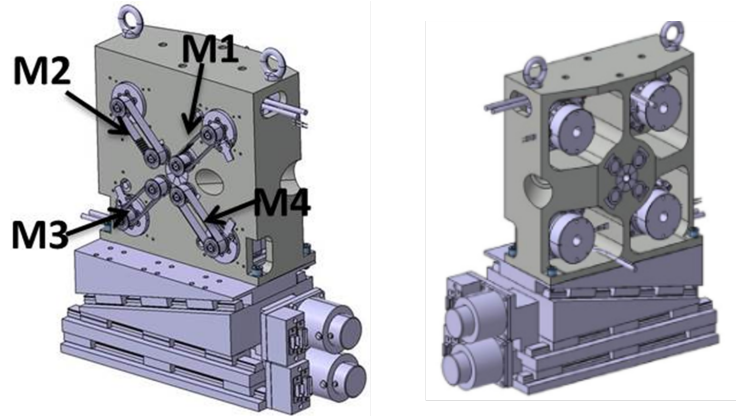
(Mechanical design (left) and an assembled QUAPEVA (right) mounted on a translation table.
